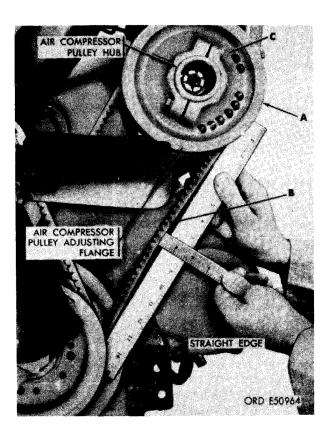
ADJUSTING AIR COMPRES-SOR DRIVE BELT DEFLECTION .
